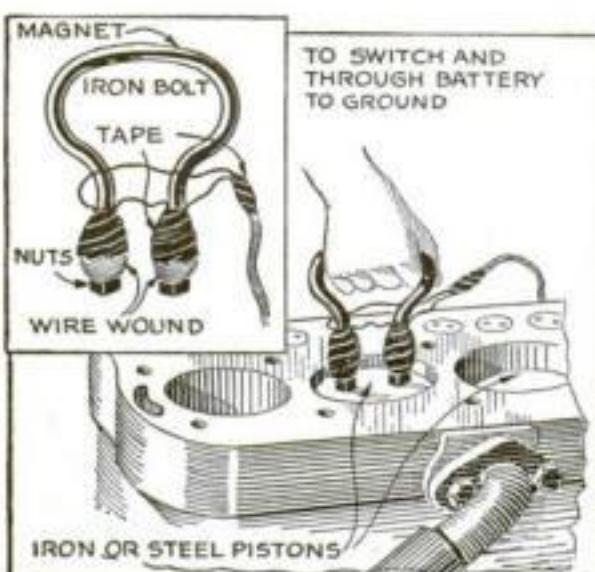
An iron bolt is bent into horseshoe and wound to form a magnet to test iron pistons.
